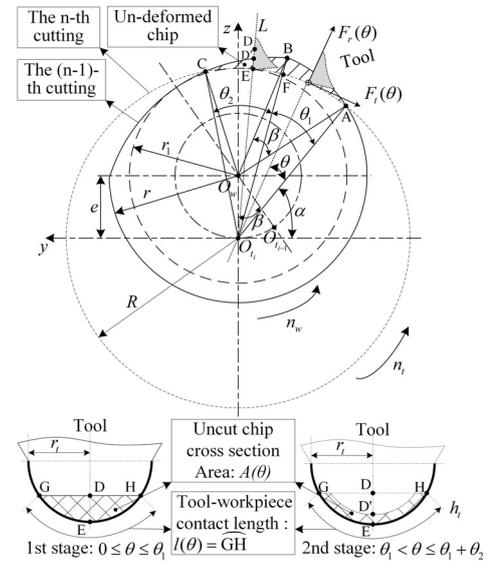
Un-deformed chip geometrical details of whirling milling.
